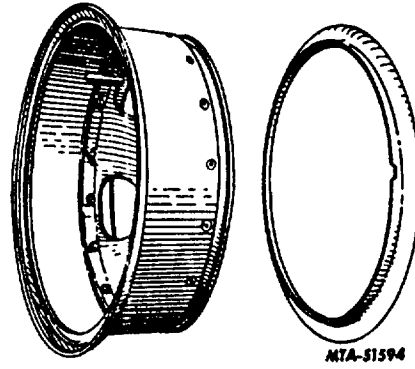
DISC WHEELS AND SIDE RINGS
